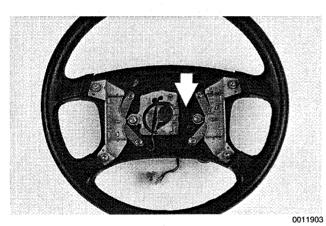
Airbag contact ring lock (arrow). Pry out lock and remove spring from behind lock. Some airbag steering wheels are not equipped with contact ring lock.
